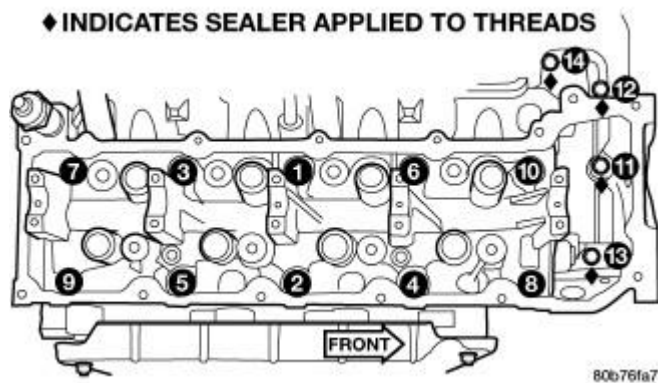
Cylinder Head Bolts Removal/Tightening Sequence
